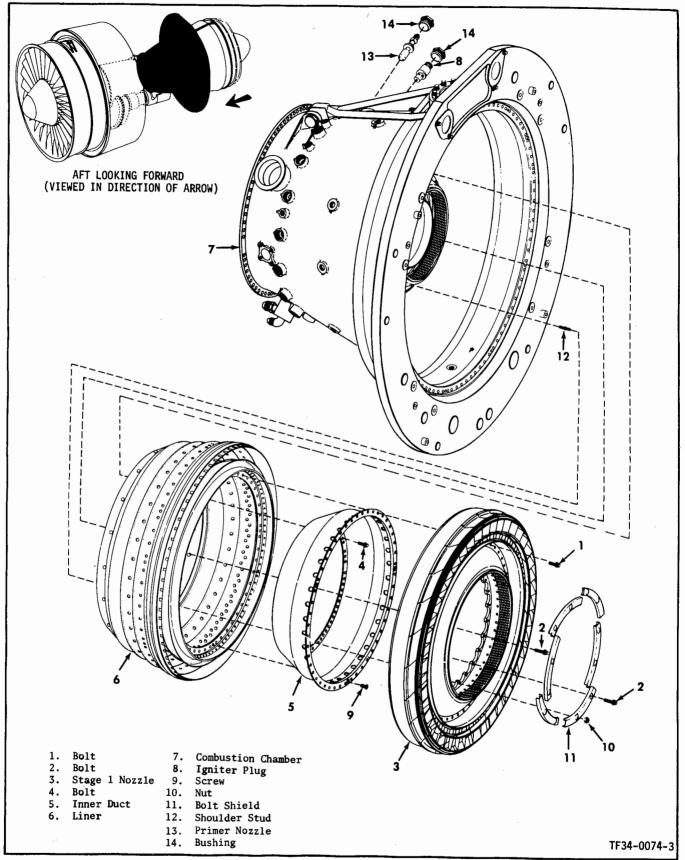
Removal of Stage 1 Nozzle, Aft Inner Duct, and Combustion Liner
